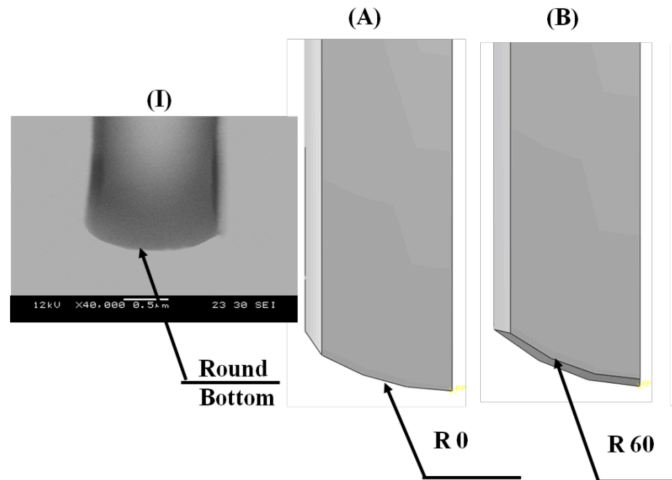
Rake face profile of various CBN tool tip geometries: (I) FIB-machined; (A) Sharp Tool with infinite edge radius (R0); (B) Round tool with 60nm edge radius [1];
